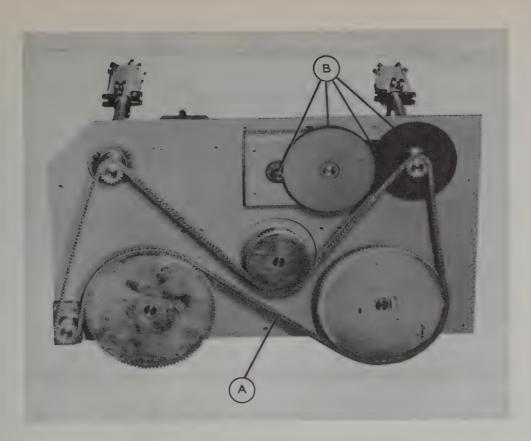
Lubrication of IPA Plate Tank Drive Assembly.
